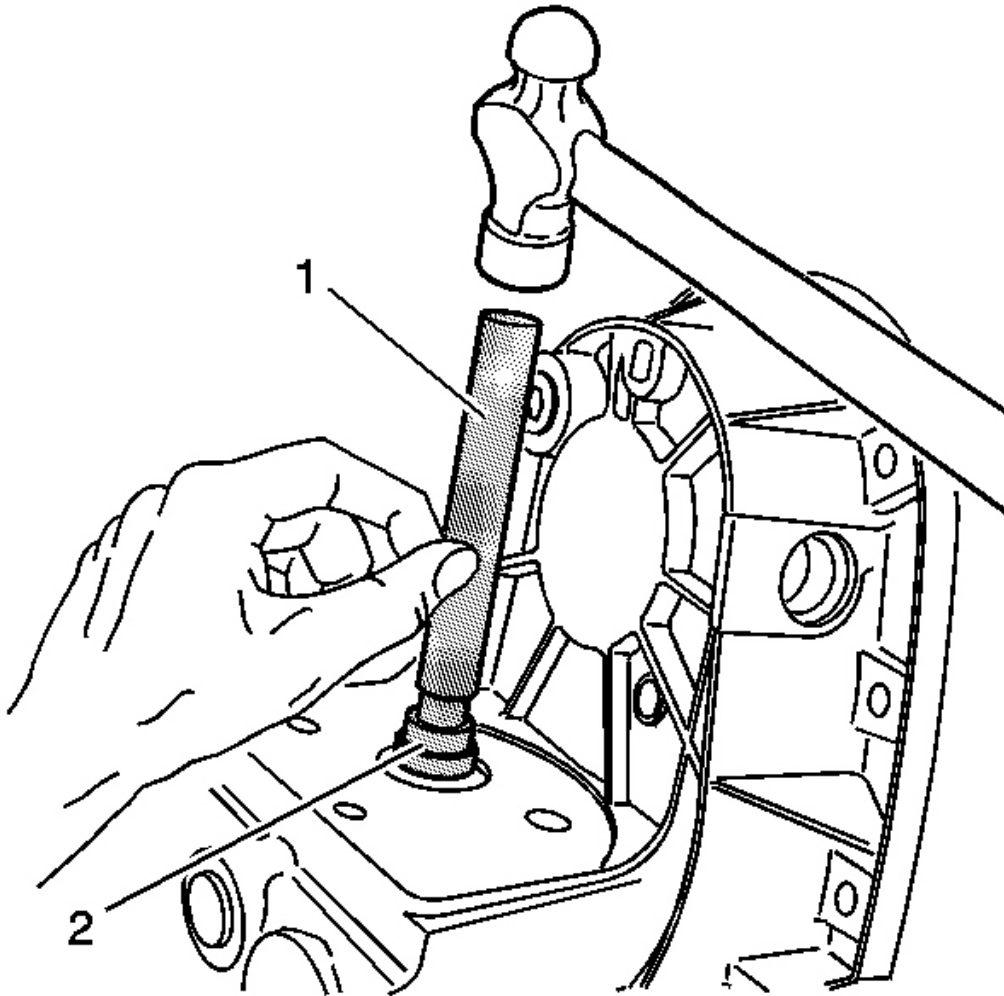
Installing The Rear Output Shaft Bearing
